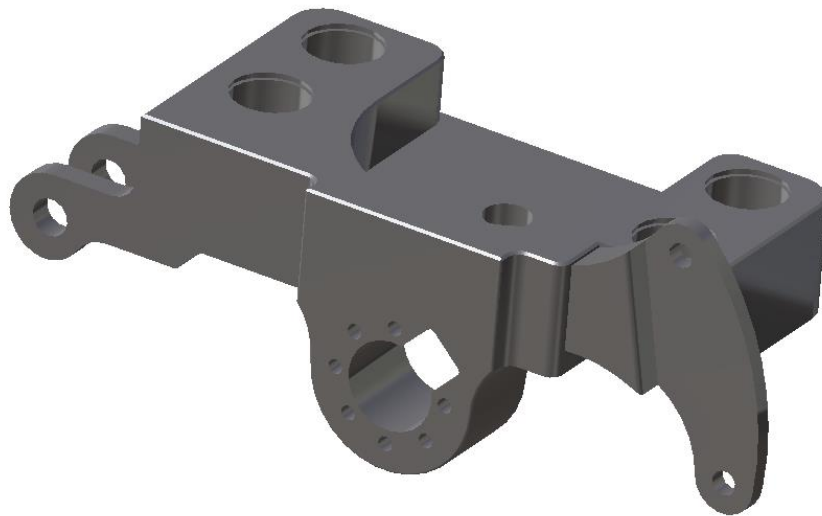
Floating spindle. In wheel motor and brake caliper are placed on the floating spindle so they move together.
